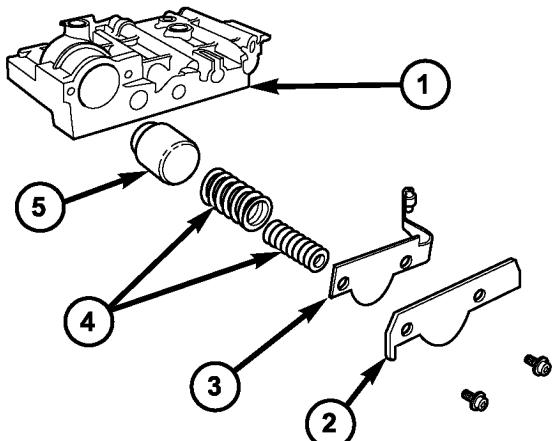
Install Valve Body to Transfer Plate Screws
